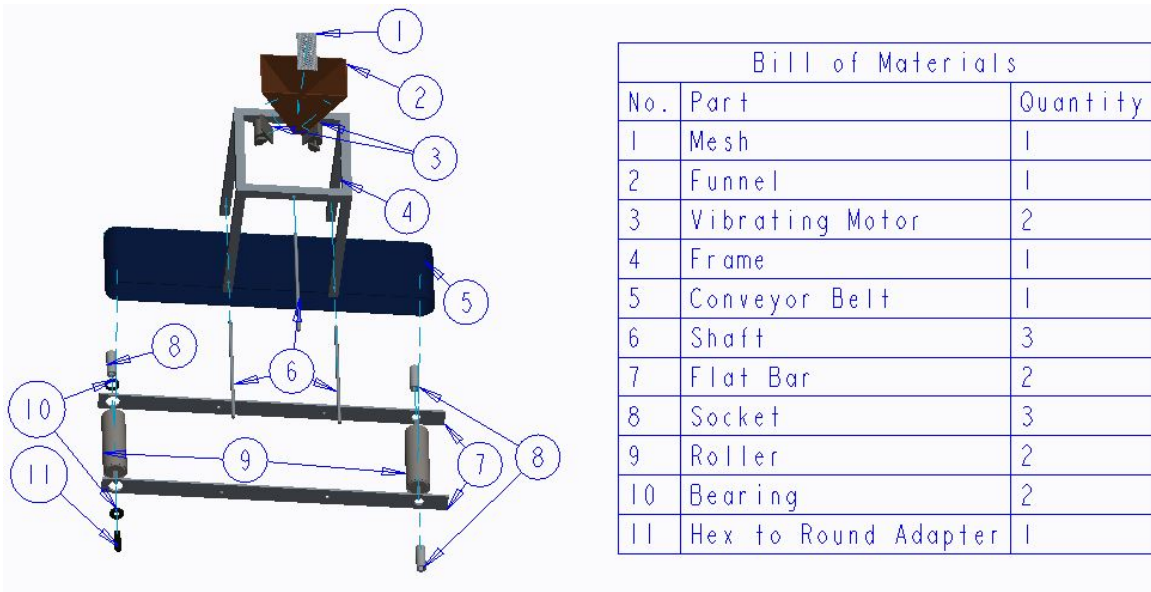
Exploded view of assembled prototype in Creo, front angle with bill of materials on the side.
